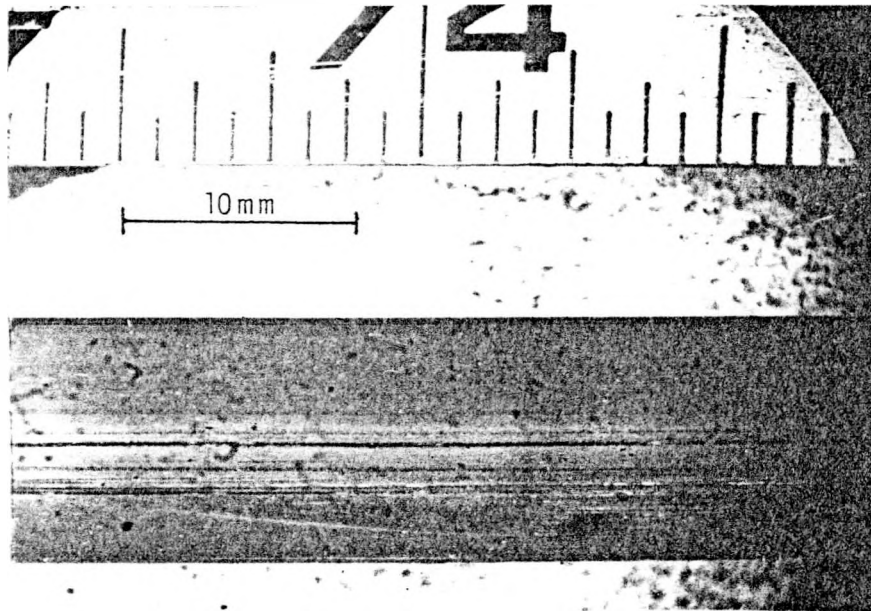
Photograph of Stainless Steel-Clad Pressurized Water Reactor (PWR) Fuel Rod from Connecticut Yankee Fuel Assembly S004. The Cladding Surface is Relatively Clean and is Free of Cracks. Longitudinal Scratches Were Caused by Fuel Rod-to-Spacer Grid Contact During Rod Removal.
